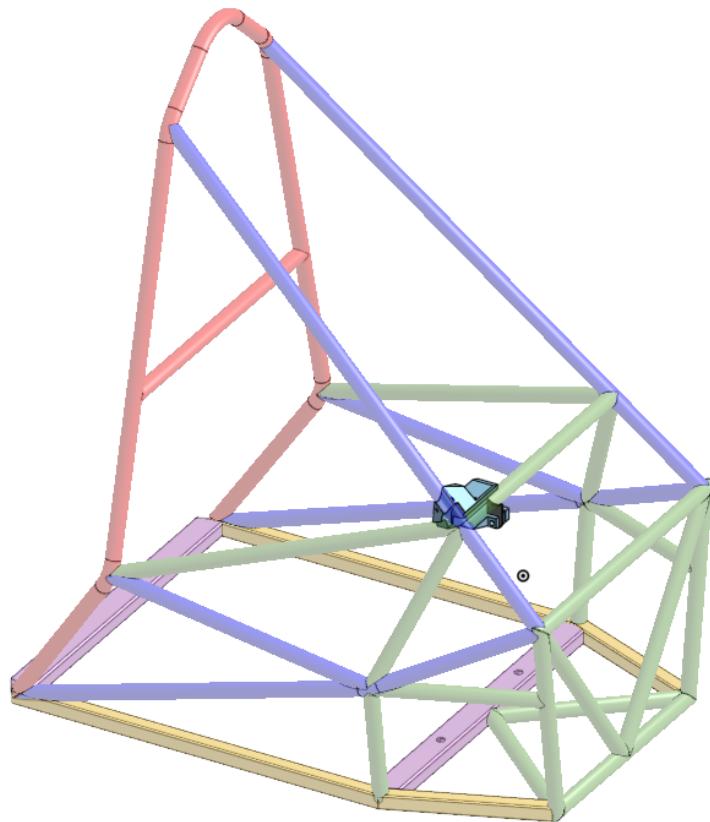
Drivetrain V2 Chassis Tab Jig Position
